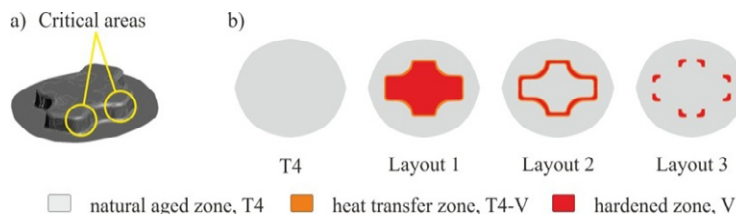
(a) cross die geometry as model for deep drawing; (b) heat treatment layouts of the initial blank
